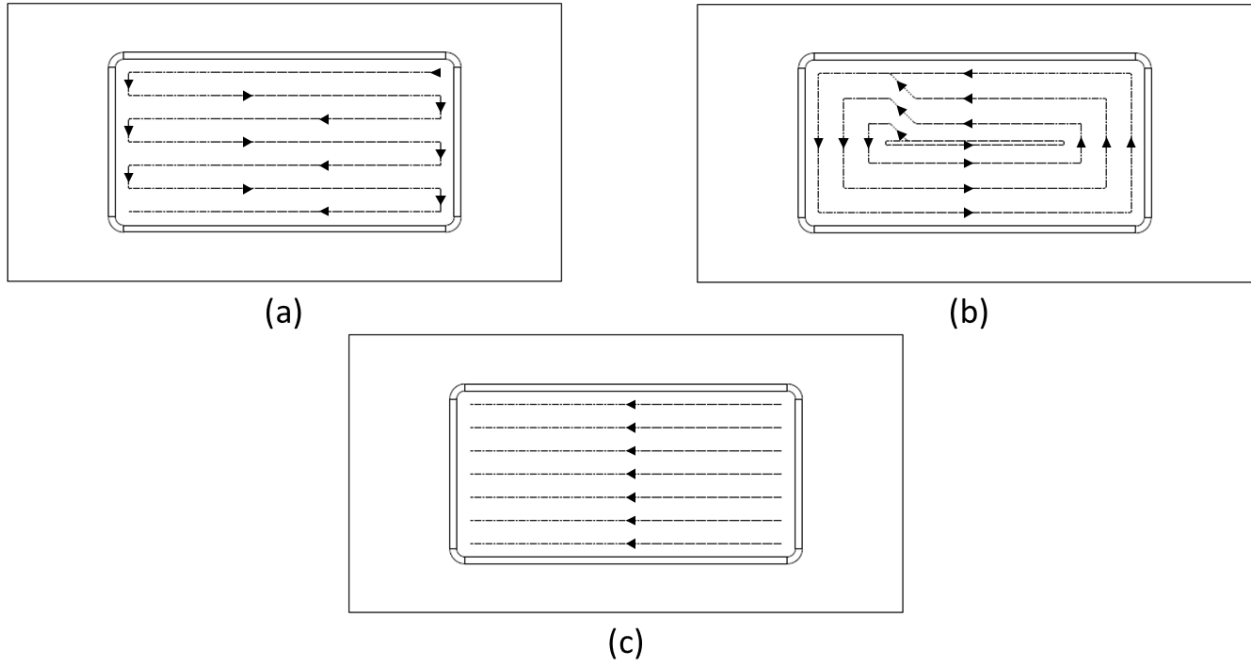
Conventional pocket milling tool paths; (a) zigzag, (b) helical spiral & (c) unidirectional.
